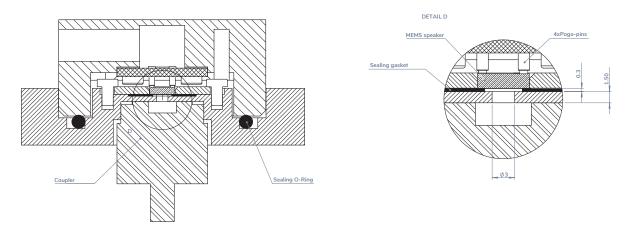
Coupler adapter cross-section. The speaker adapter is directly screwed onto the coupler; the earmould adapter is not used. The outlet for the speaker is round with a diameter of 3 mm and length of 1.5 mm, as shown in Detail D.
